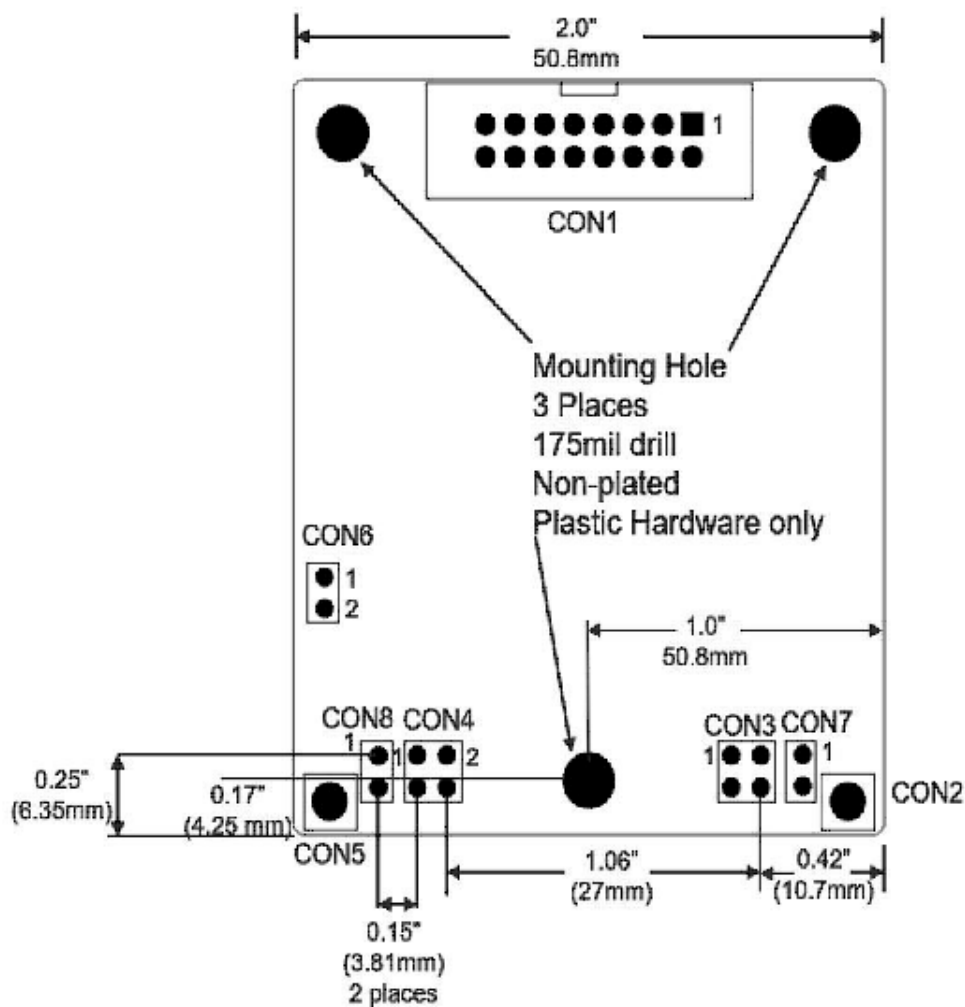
Si82Fx Gate Driver Board (GDB) Dimensions
